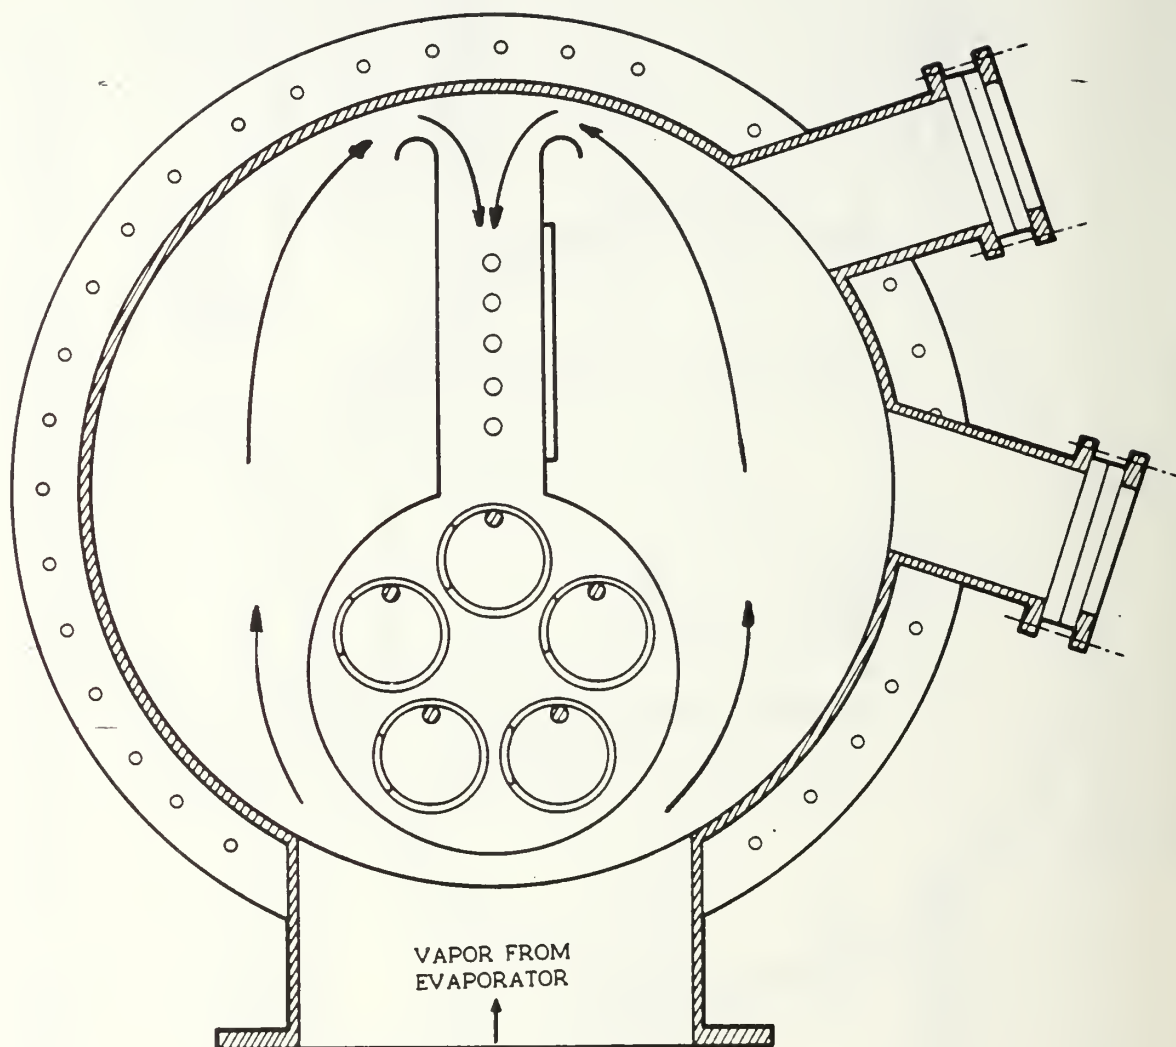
Sectional View of Multi-Tube Apparatus
